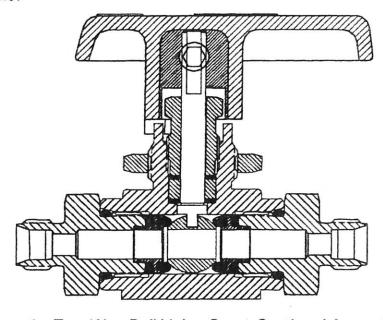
Two-Way Ball Valve Cross-Sectional Assembly with PTFE Packing
